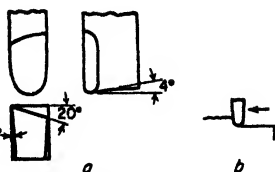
Tool No. 4. (a) Right-hand round-nosed roughing tool for steel; (b) Application of the tool. (The G. A. Gray Company)
